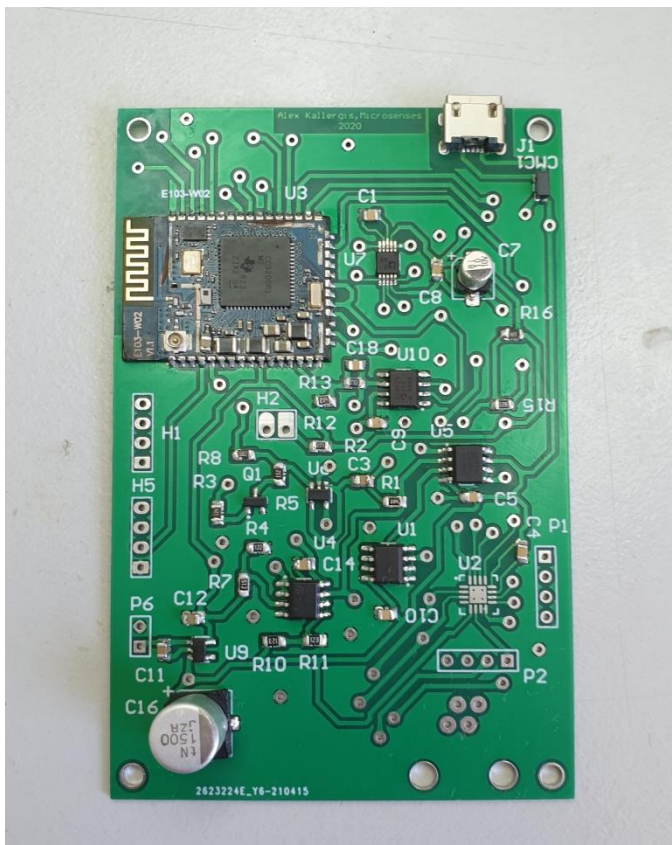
Measurement board prototype. P2 is the EIS header for I/O.
